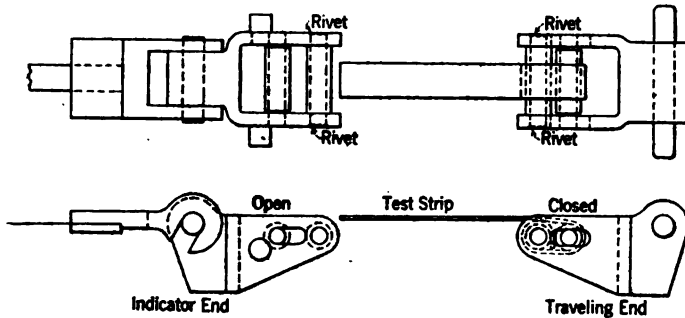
GRIPS FOR MACHINE FOR TESTING TENSILE STRENGTH OF CABLE PAPER
